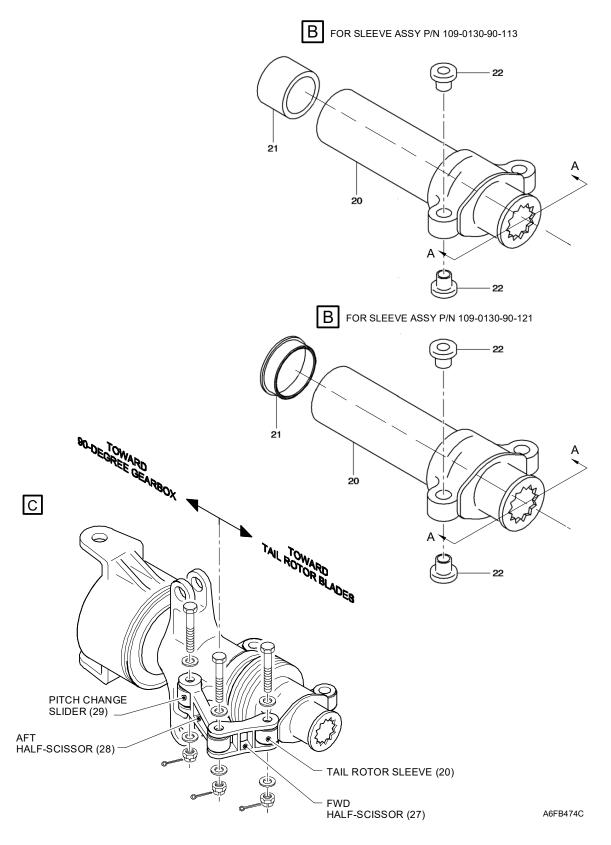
(sheet 2 of 3). Tail rotor installation
